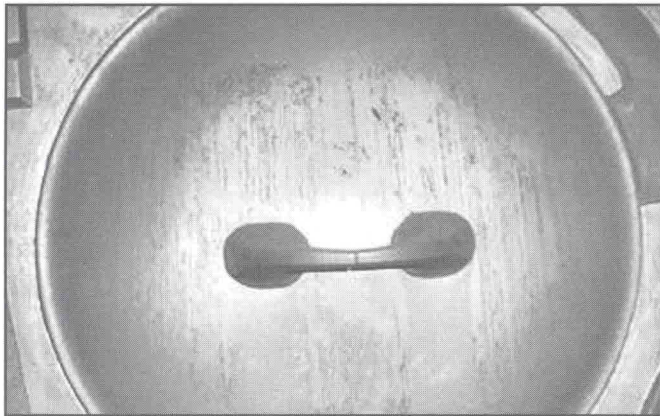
This pattern for a Dutch oven cover shows the handle closed as it would be when packed with sand to form the mold
